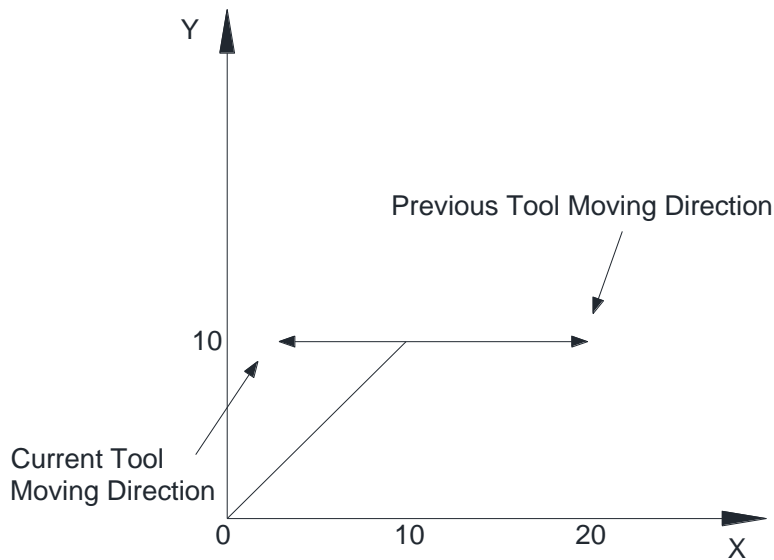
Schematic Diagram of Tool Moving Direction
